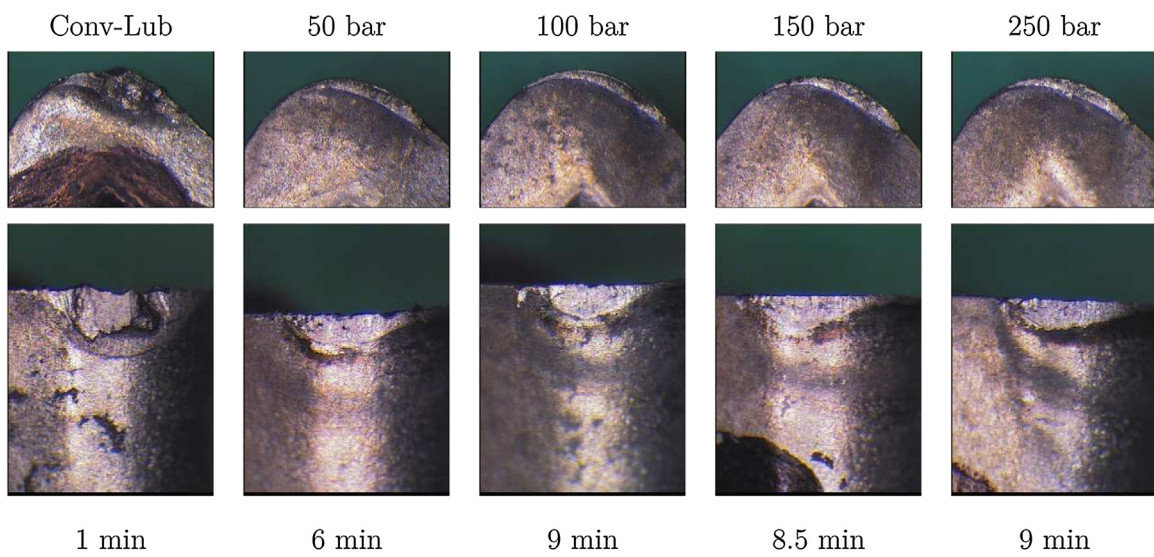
Flank and crater wear at the end of tool life, $V_C = 88$ m/min.
